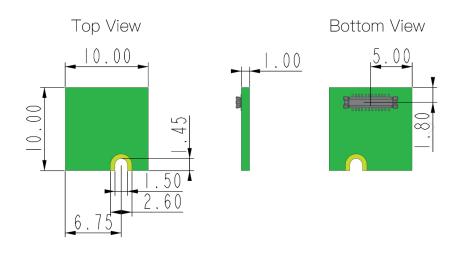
RAK1905 WisBlock 9-Axis Module mechanical drawing
